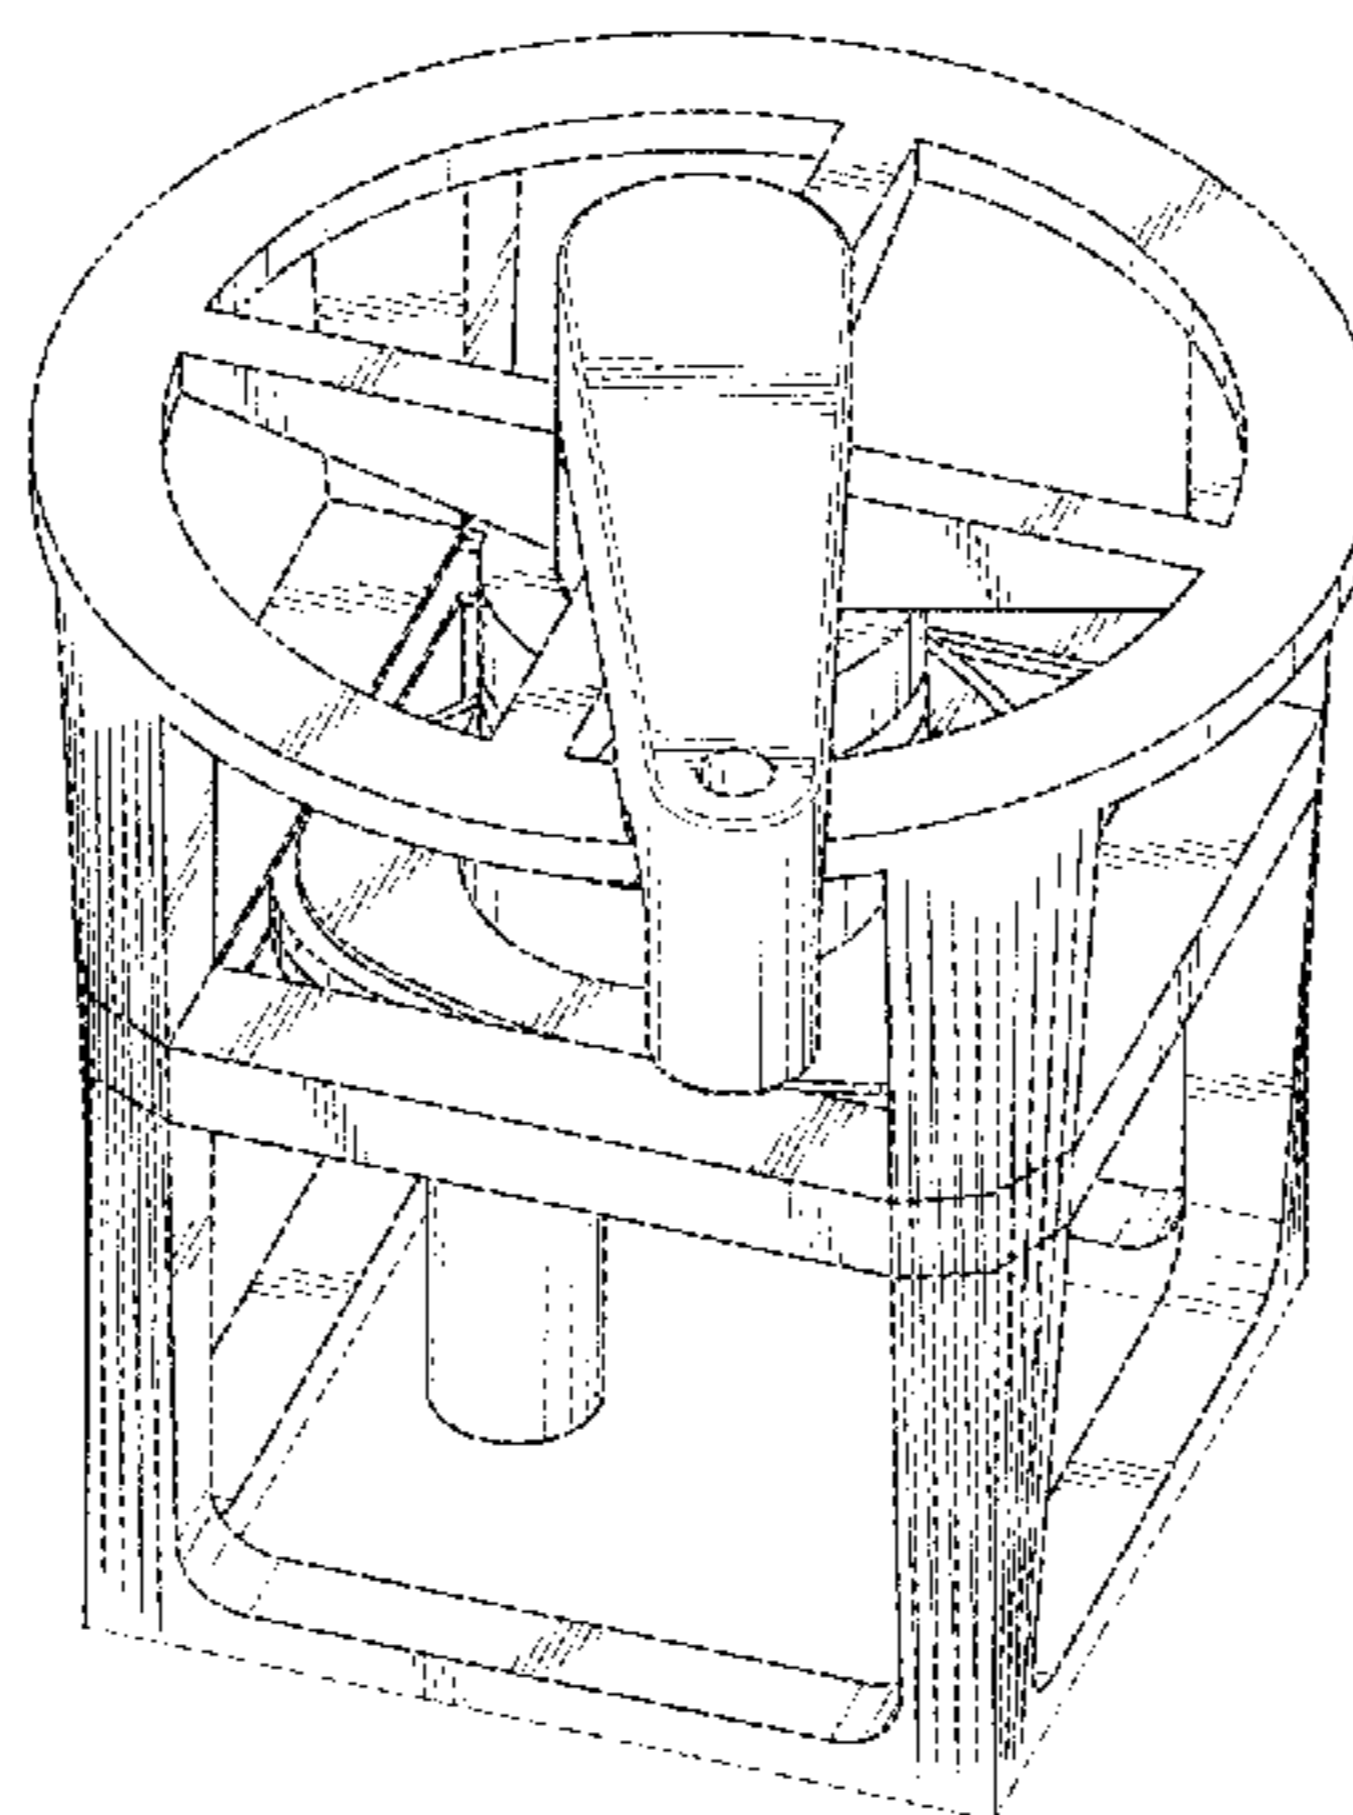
is a front perspective view of a drawing tool showing our new design.
